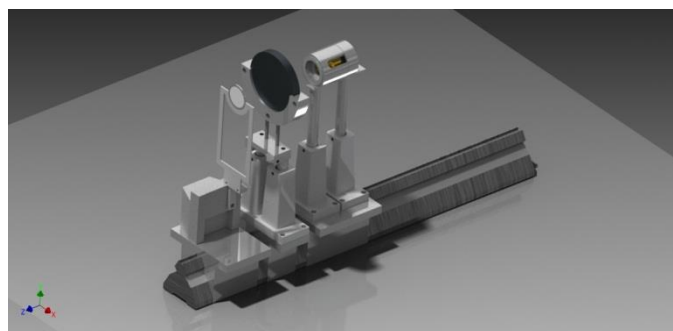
CAD drawing of the new target and detector holder, consisting of an optical bench and modified positioners.
